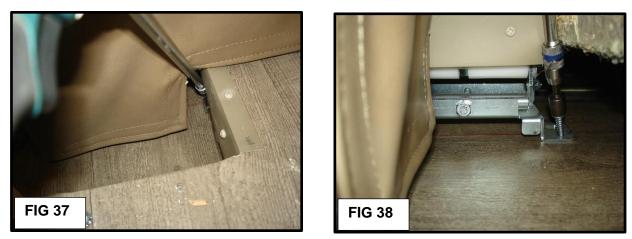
Use the screw gun, the long extension and the 3/8" nut driver bit. Install the front screw (closest to you) in the left / right brackets.
